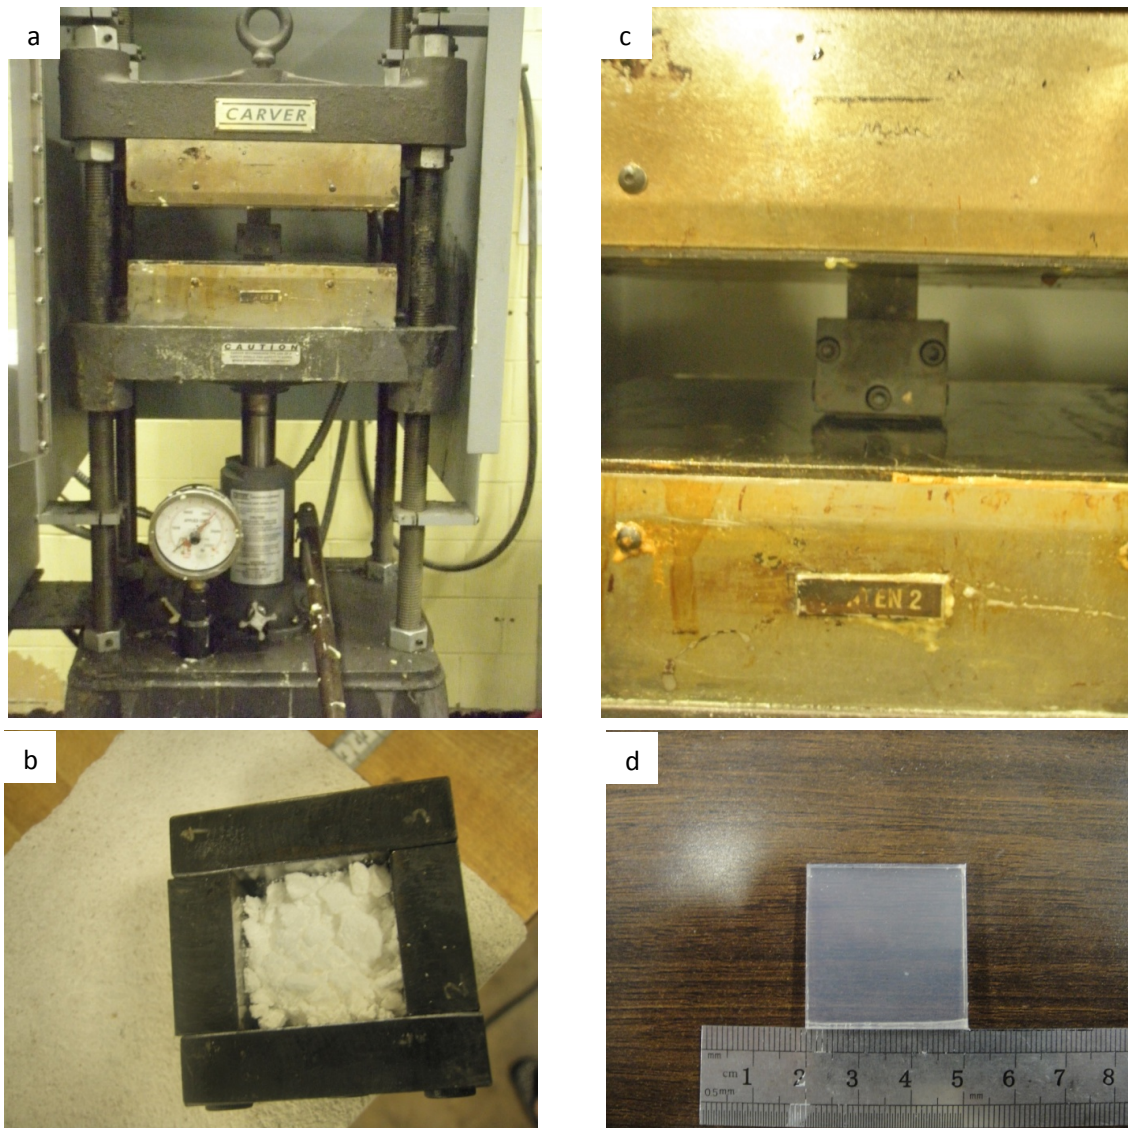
Carver heated-platen compression machine (a), the square mold (b), square mold in press (c), and final compression specimen (d).
